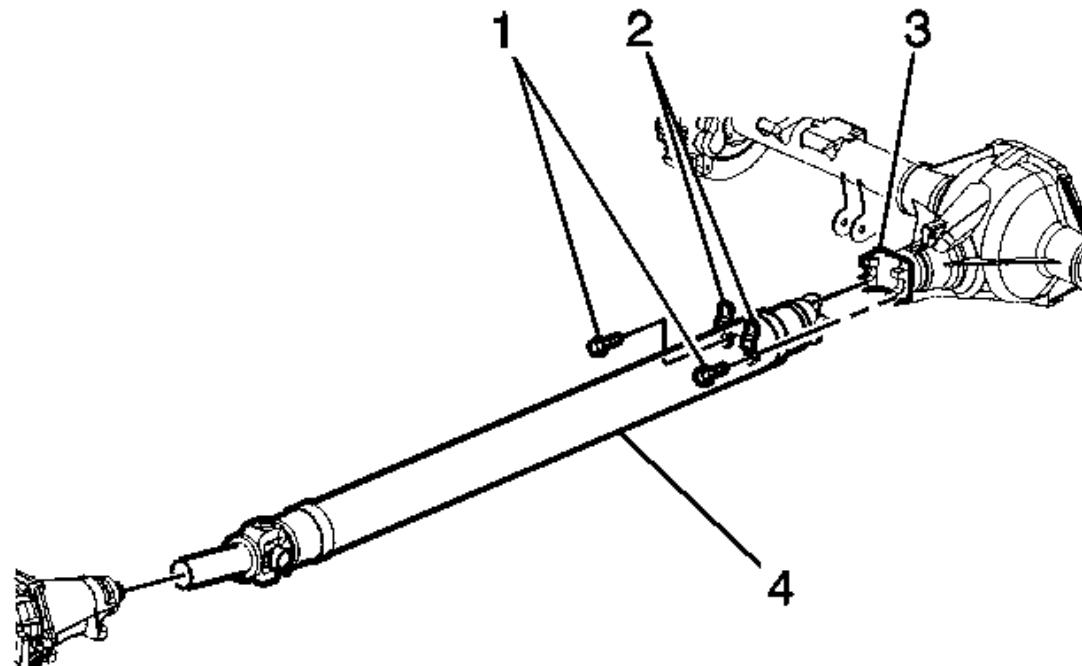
Yoke Retainers, Rear Axle Pinion Yoke & Bolts
